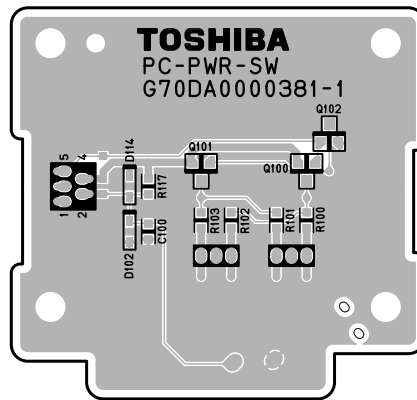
PWR-SW PC Board (Bottom side)
